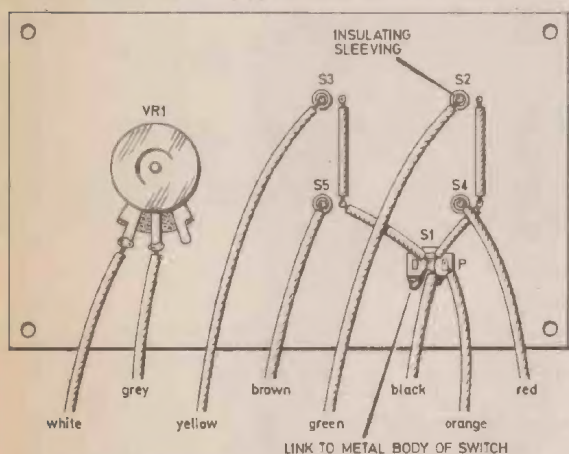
Front Panel wiring. Note that one pin of each push-button switch is fitted with an insulating sleeve.
